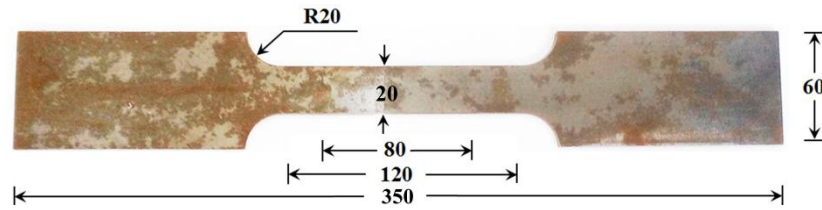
Specimen for tensile testing (All dimensions are in mm)
